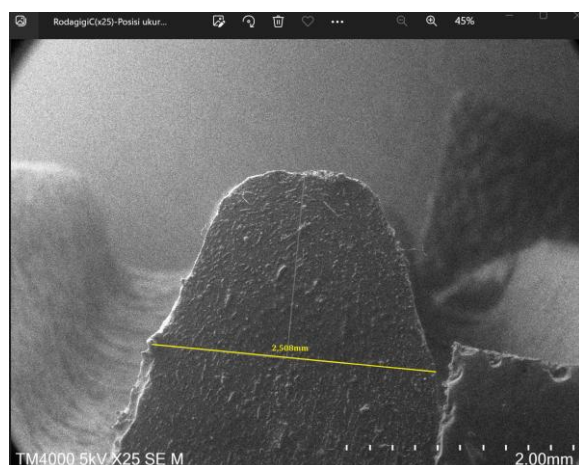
SEM photo for tooth thickness of worm gear ring for Onyx material condition with lubricating grease (C code)
